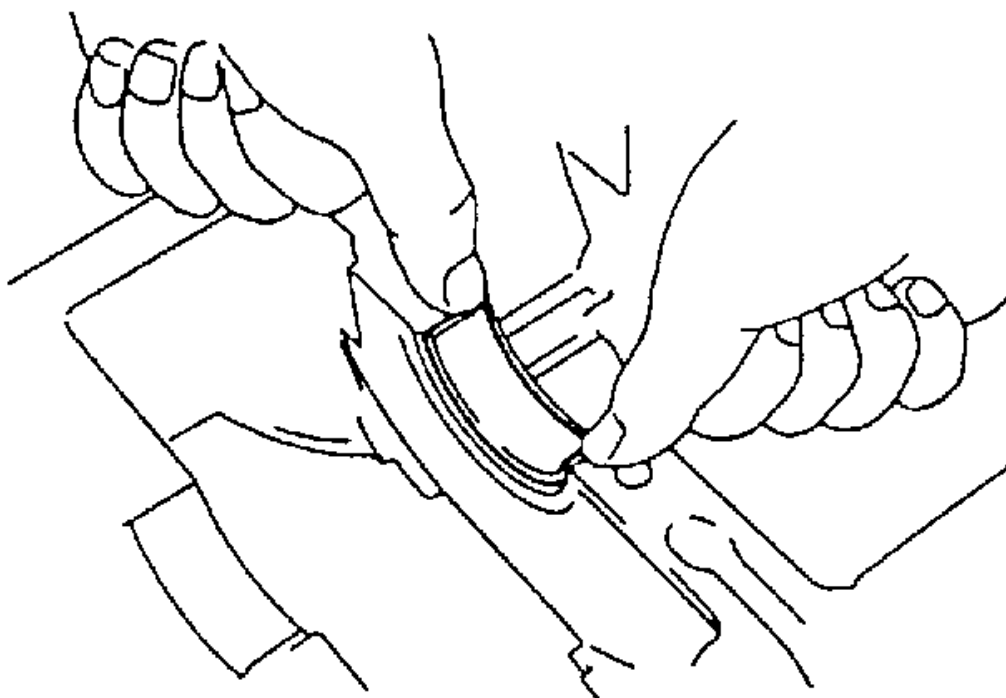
Installing Lower Main Bearings Into Lower Crankcase
